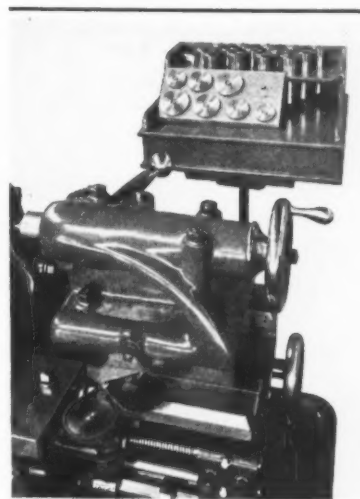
Dial that Indicates Proper Time to Engage Half-nuts for Producing Metric Threads
